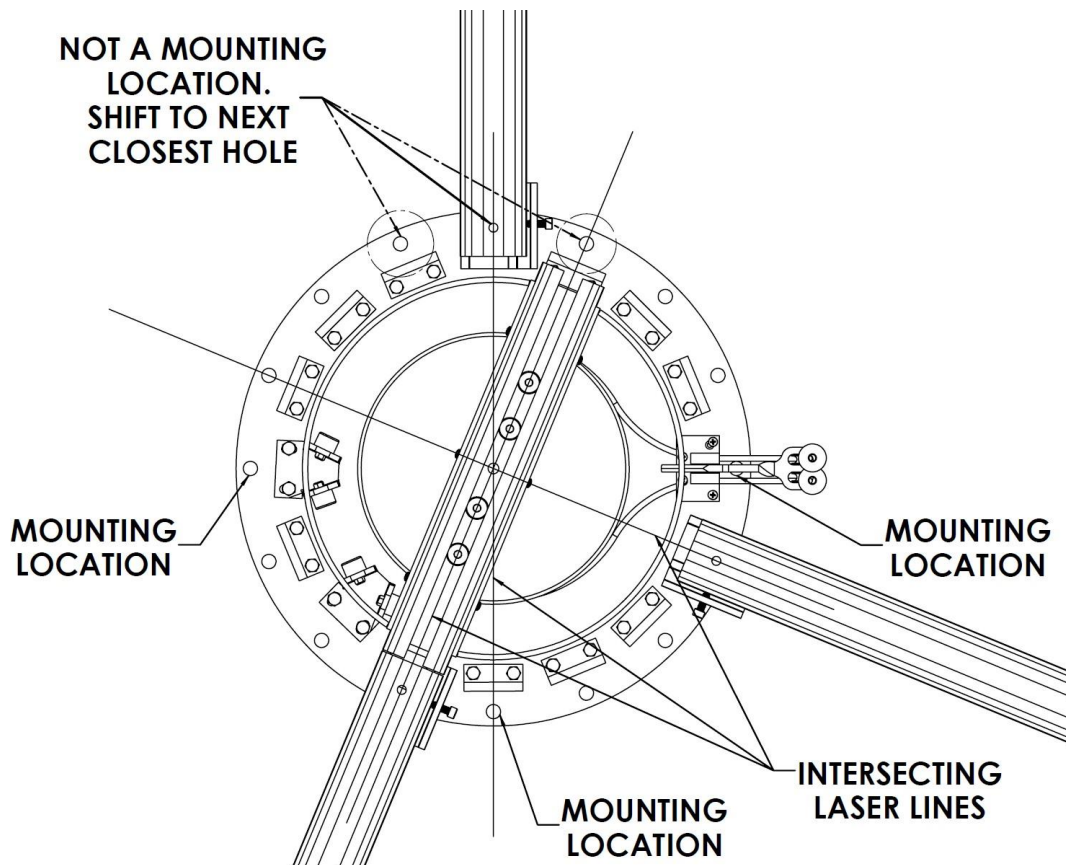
Ensure the Mounting Points Align with the Holes on the Turntable Plate
